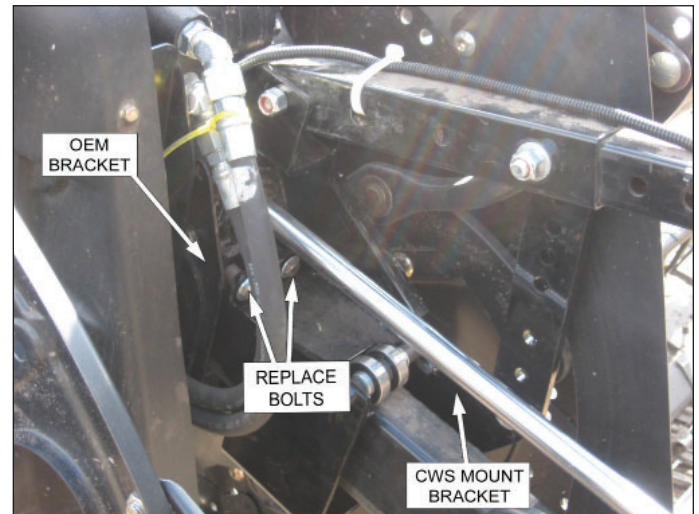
Center reel arm (FD70 & CIH 2162 headers)
